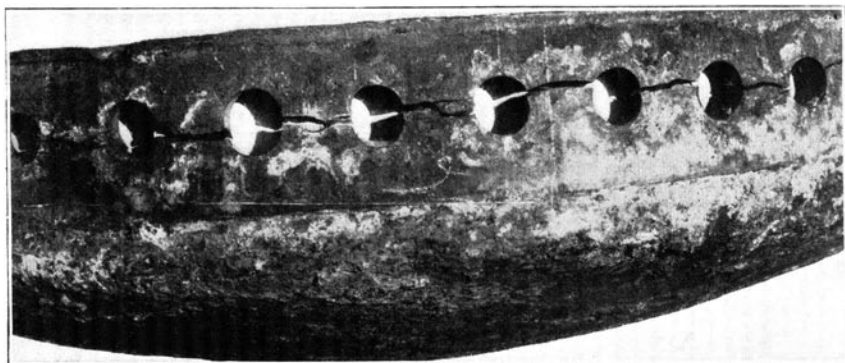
EMBRITTLED DRUM HEAD FROM A 770 H.P. BOILER
